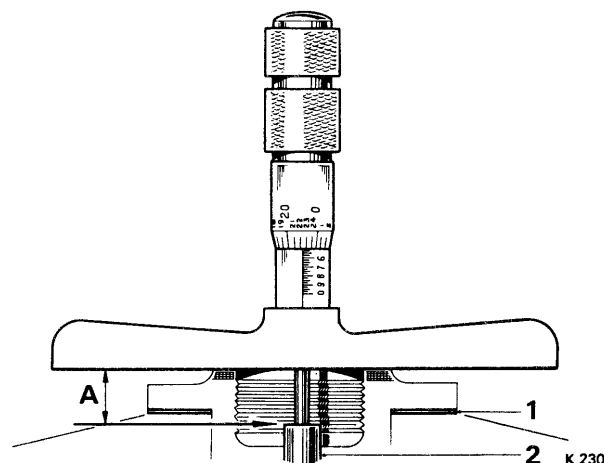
CHECKING THE POSITION OF THE BRAKE PUMP PUSH ROD
